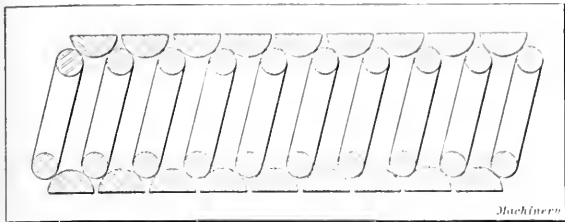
Sectional View of Wheelock Lubricant Tube showing Construction
